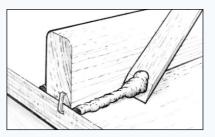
Remove or shape excess epoxy that squeezes out of the joint.
